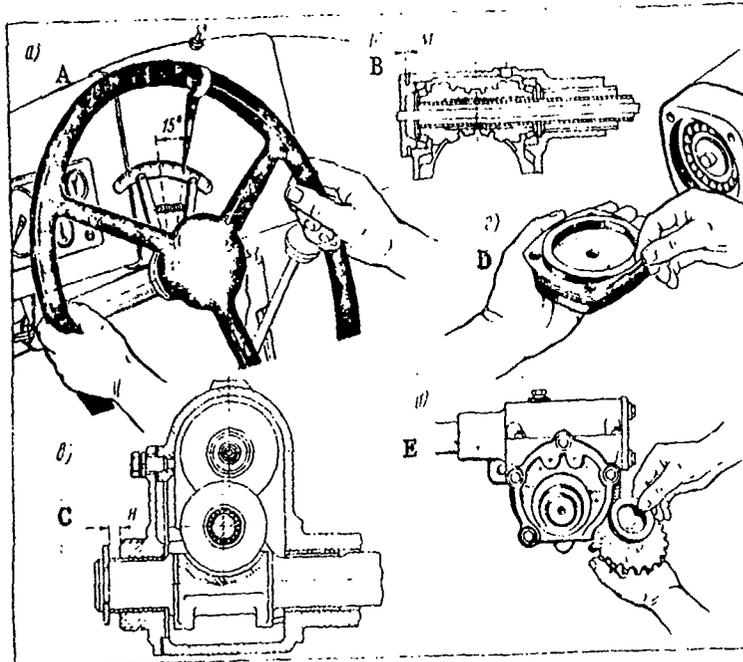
Checking the steering wheel free play and adjusting the steering mechanism
